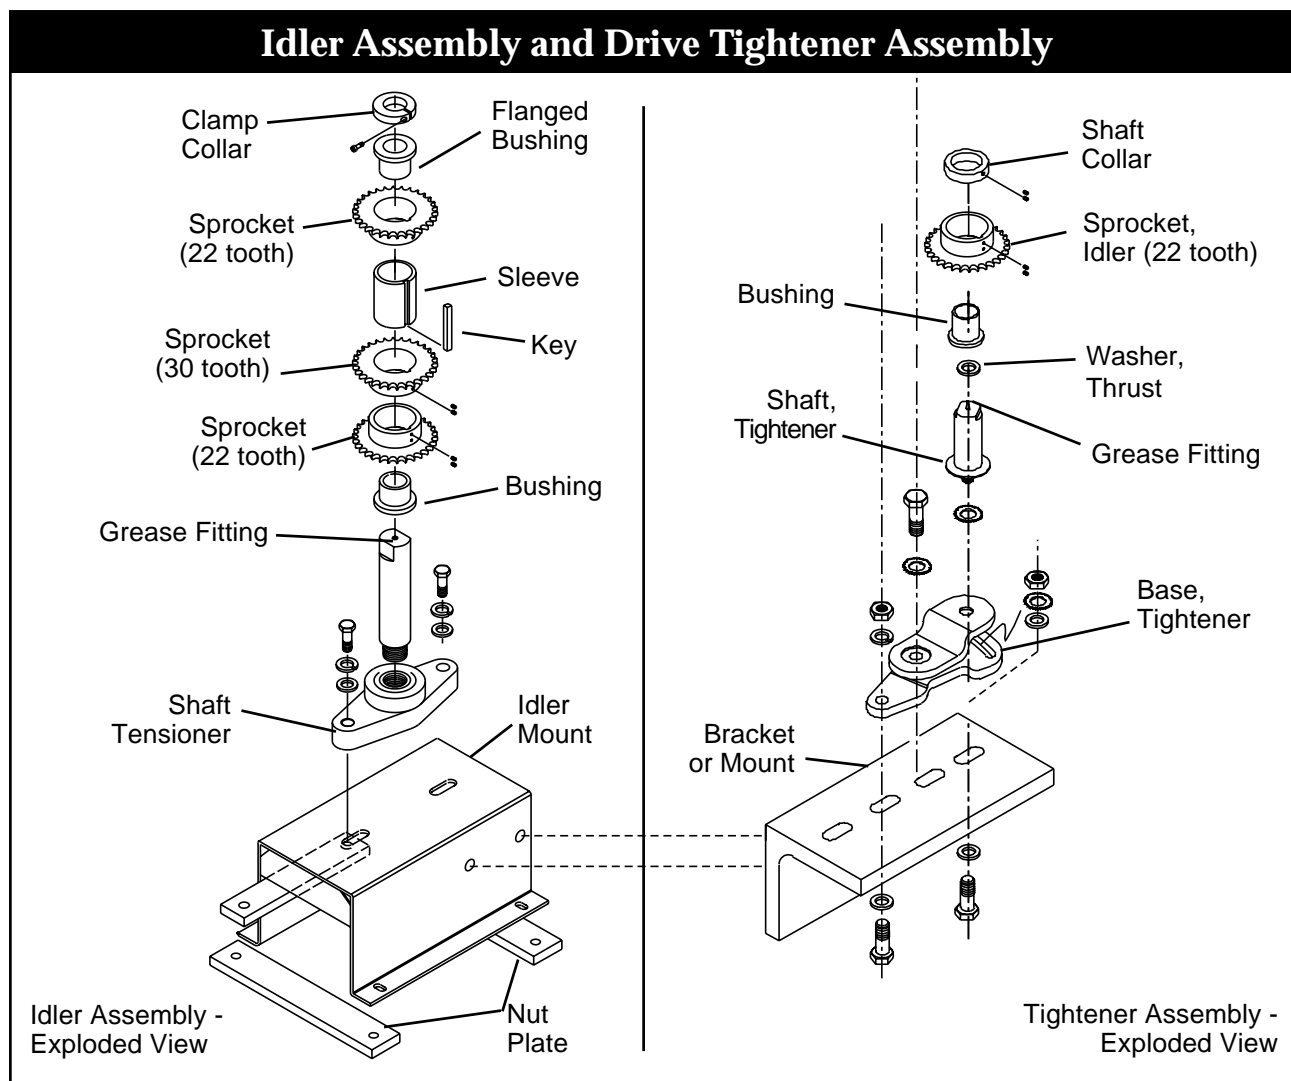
Idler Assembly left, Drive Tightener Assembly right
